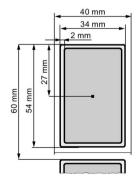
SIMATIC RF630L 6GT2810-2AB03 dimension drawing
